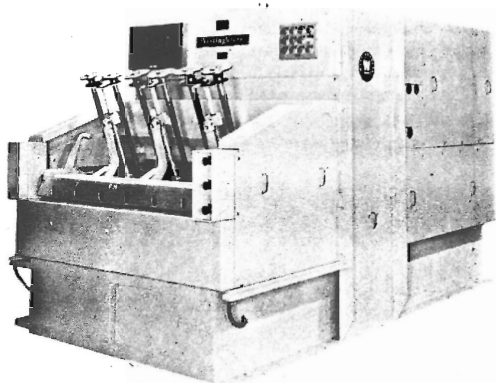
Automobile rear-axle shafts being hardened at 3,000 cps. (*Westinghouse Electric Corp.*)
